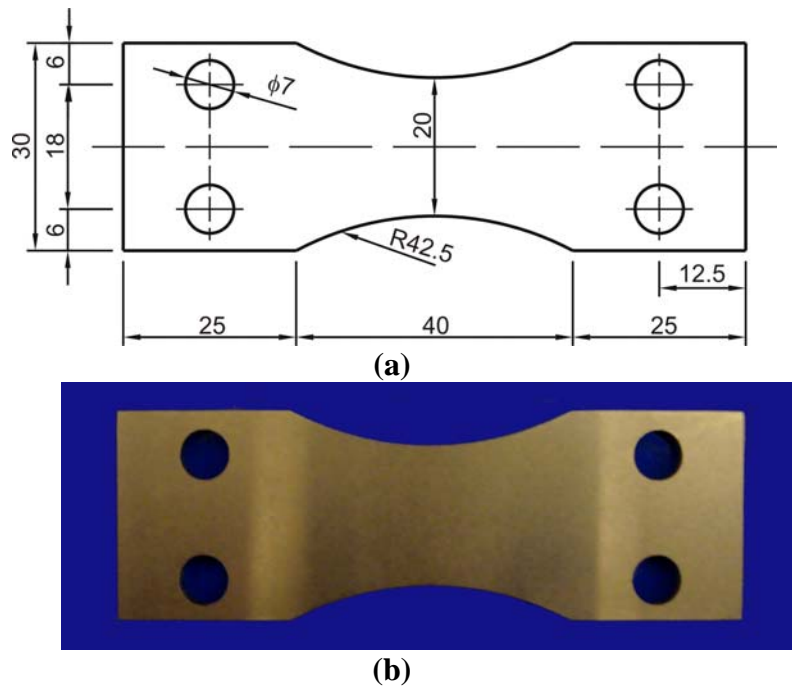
(a) Geometry and dimensions (in mm) of fatigue test samples. Thickness: 2.90 mm. (b) Machined fatigue test sample.
